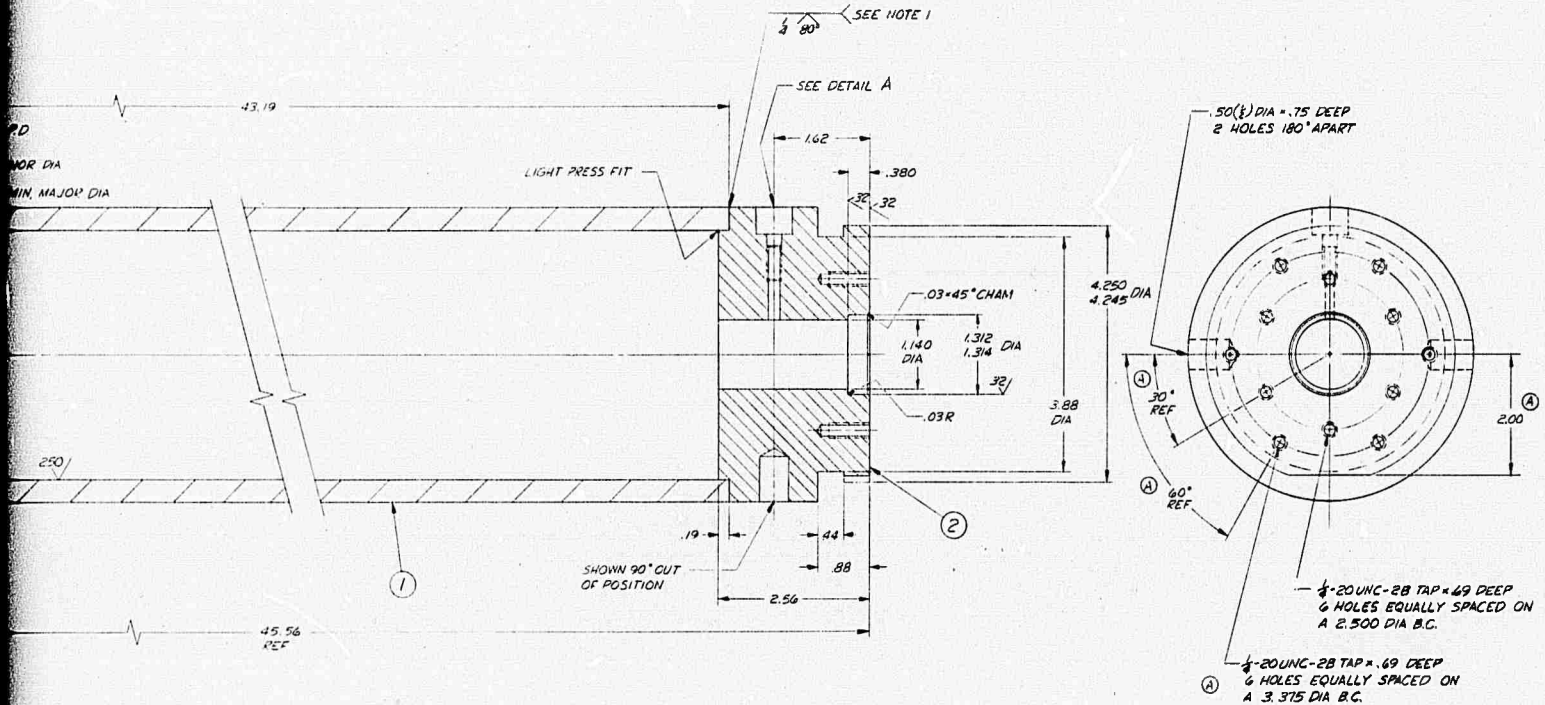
DETAIL DRAWING OF PRESSURE CASING,
